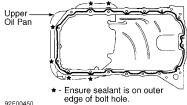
Applying Sealant on Upper Oil Pan Courtesy of Nissan Motor Co., U.S.A.
